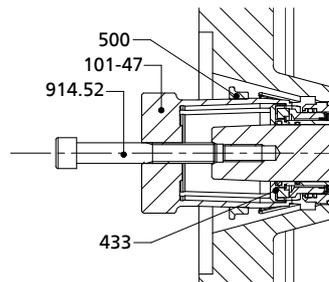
Removing the C022/025/11-4STQ double cartridge seal
